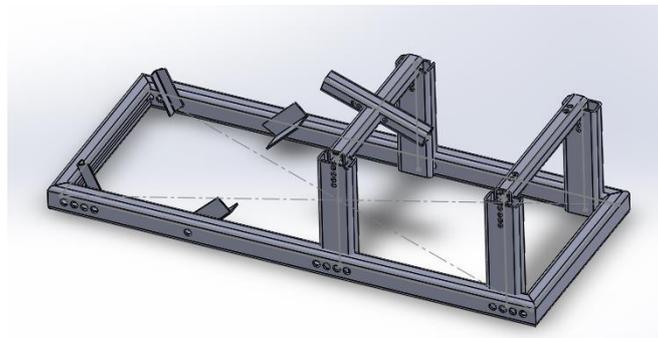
Isometric view of the device with possibly adjustable set points, steering wheel, pedals and seat attachment point.
